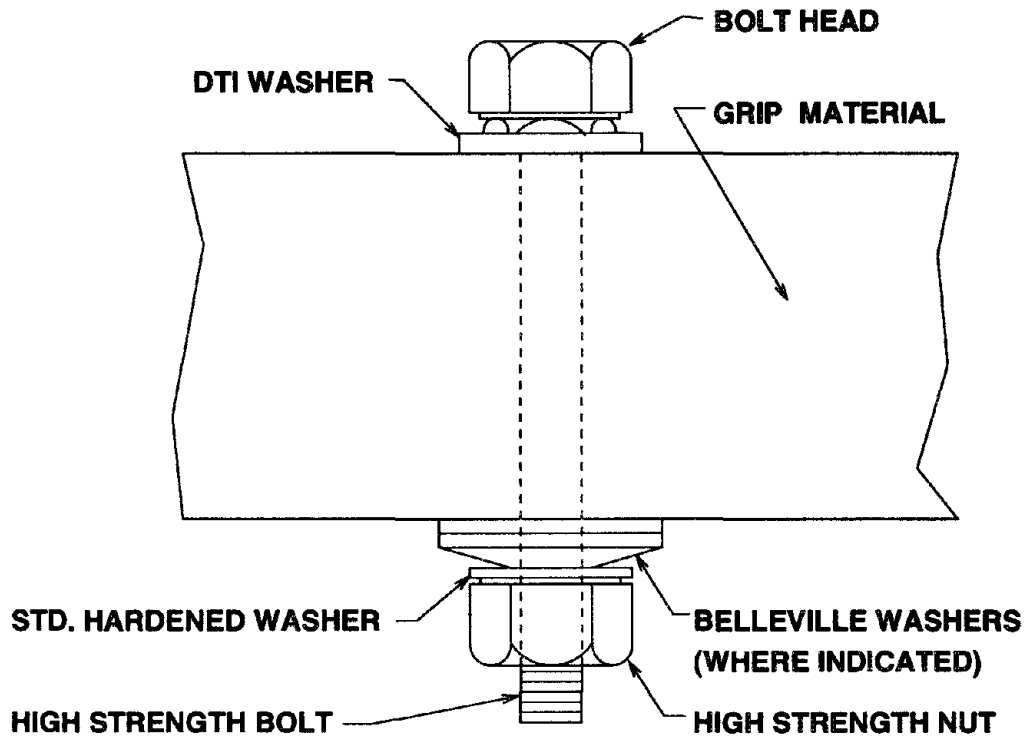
Method 1 of assembly of bolt, DTI and Belleville washers.
